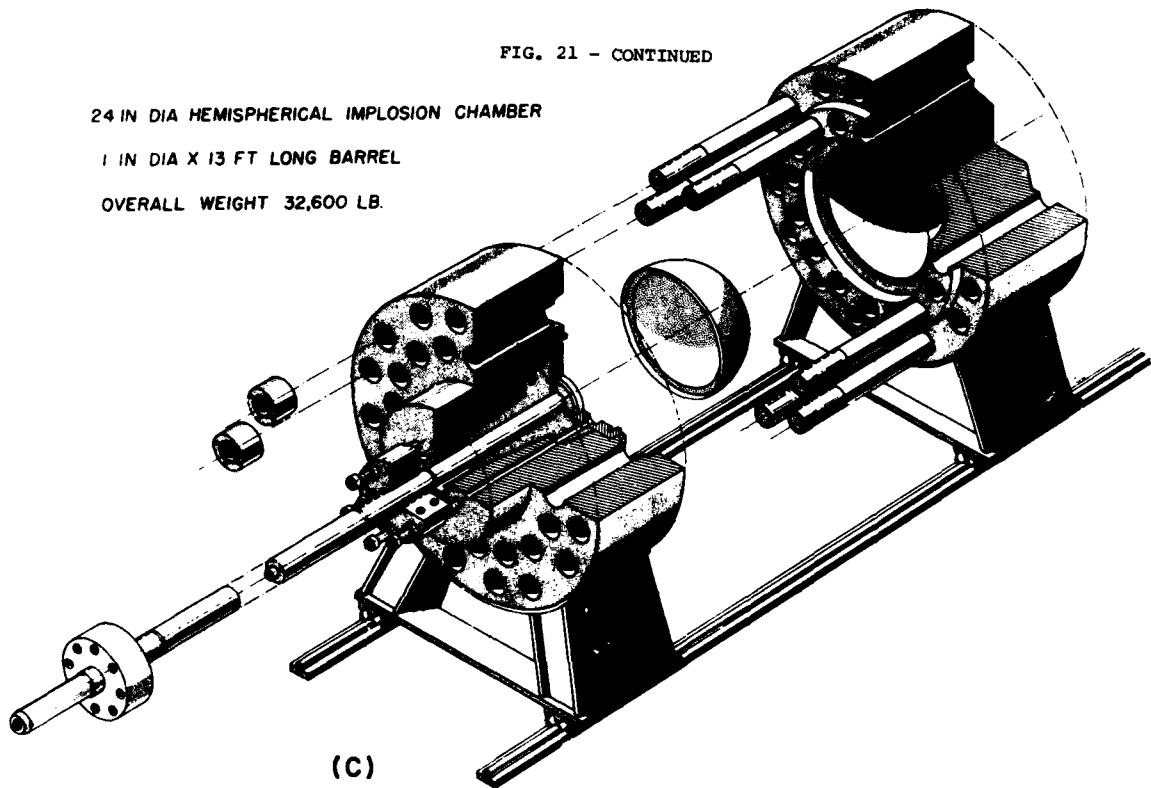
UTIAS EXPLOSIVE-DRIVEN IMPLOSION CHAMBER IN THE LAUNCHER AND SHOCK-TUBE MODES.
